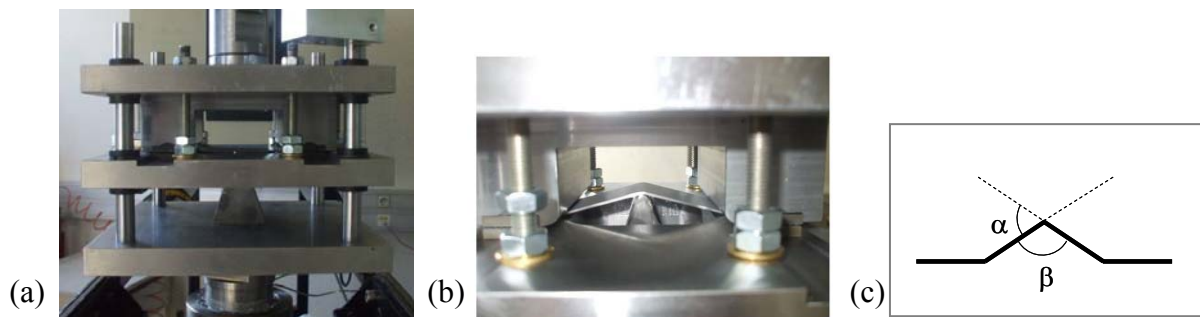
(a) stretch bending device, (b) stretch bending test in progress with specimen clamped between die and blank-holder and a punch radius of 4mm, (c) schematics of the stretch bent sheet (thick line) with α = bending angle.
